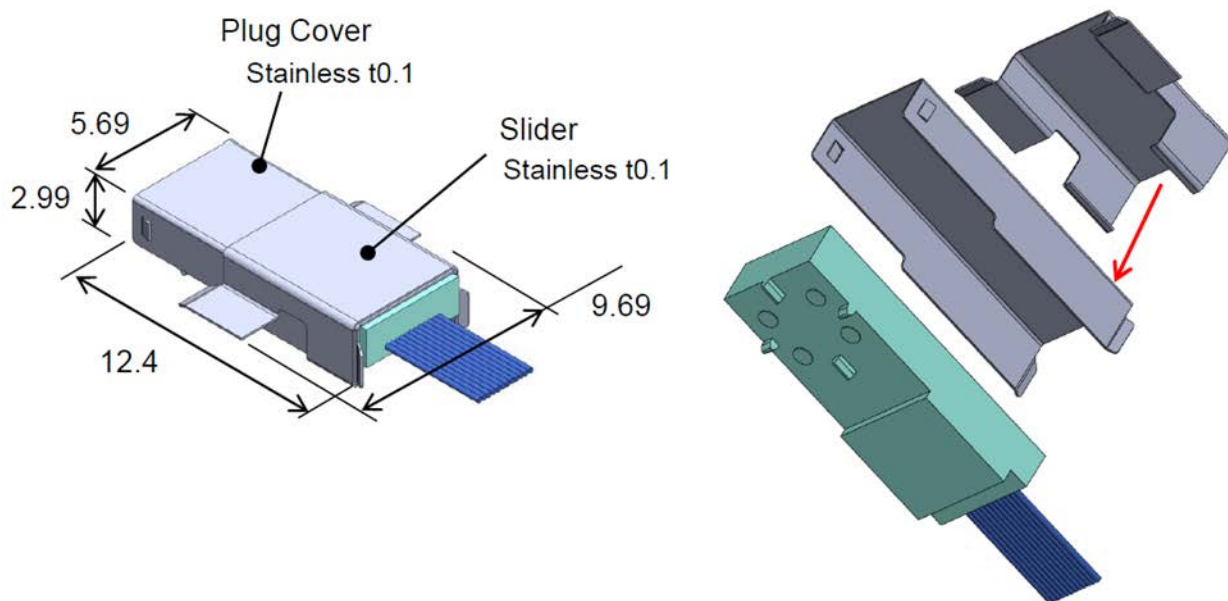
RVCON fiber connector with stainless steel plug cover and 'winged' slider.
